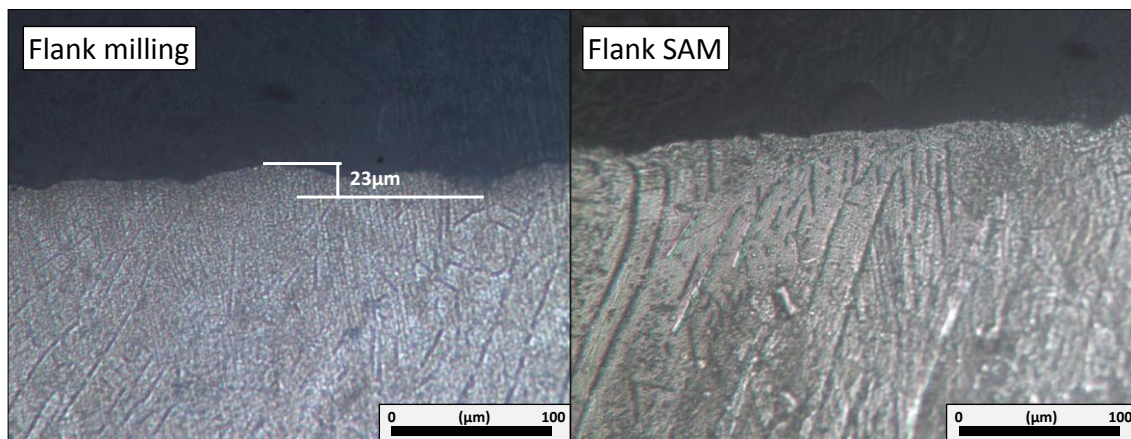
Cross-section of the Inconel<sup>®</sup> 718 surface after flank milling and flank SAM
